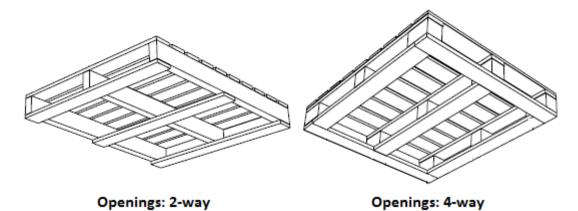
Pallet structures with 2-way and 4- way handling (Flat pallets for materials handling 2002).
